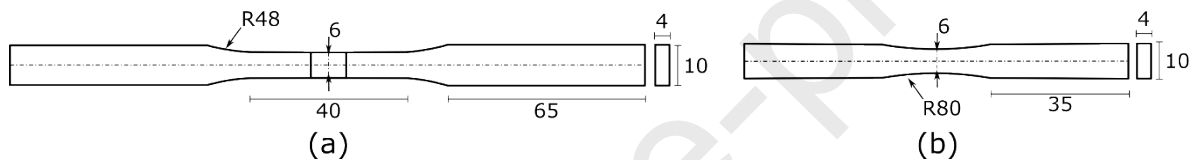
Schematic drawings showing the shape and dimensions of the fatigue specimens used in the present investigation; (a) the Al-steel HYB butt weld specimens and (b) the Al-BM specimens. All numbers provided are in mm.
